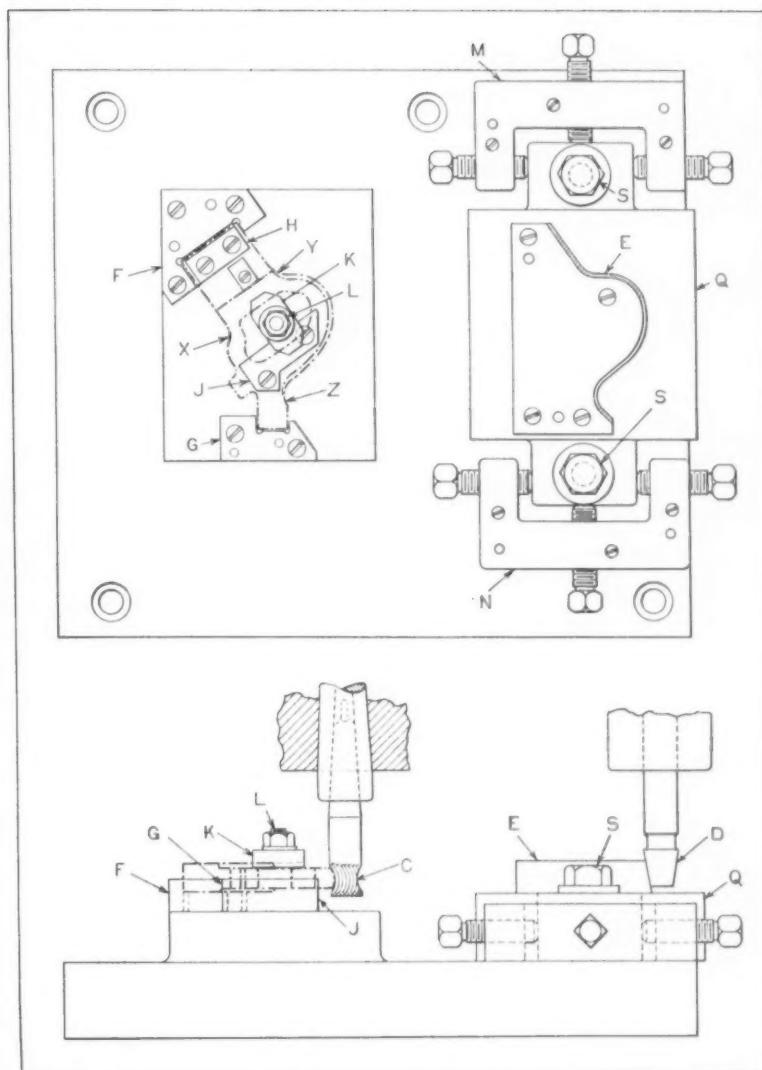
Profile Milling Fixture for Finishing Edge of Work Extending from *Y* to *Z
